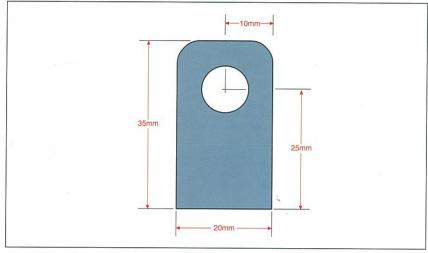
Dimensions for steering column bottom bracket. This needs to be welded in the middle of frame Tube D.
